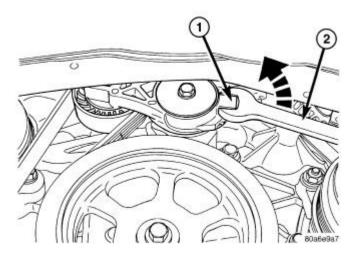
DRIVE BELT TENSION RELEASE Courtesy of CHRYSLER LLC
